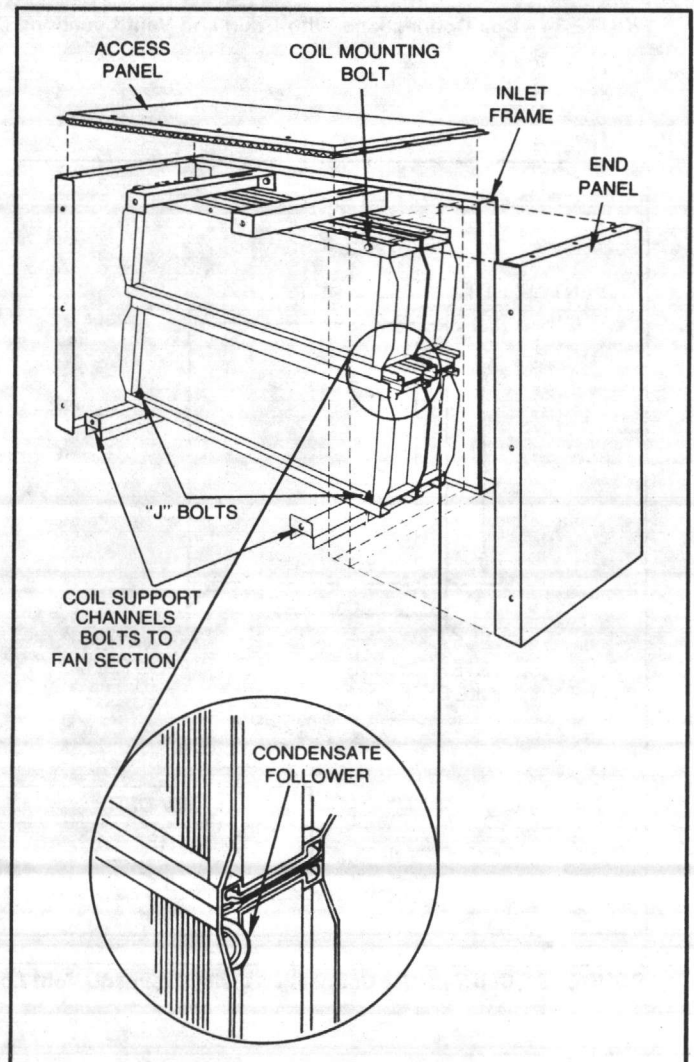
B - Draw-Thru Unit Coil Section Details with View of Condensate Follower
